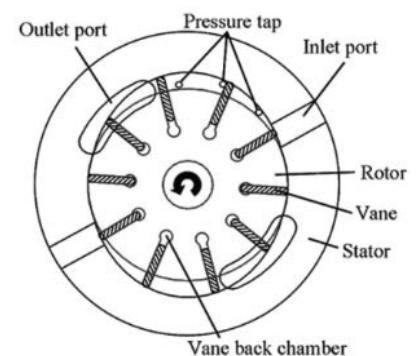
Sectional view of a double-acting rotary-vane expander (Fukuta et al., 2009).
